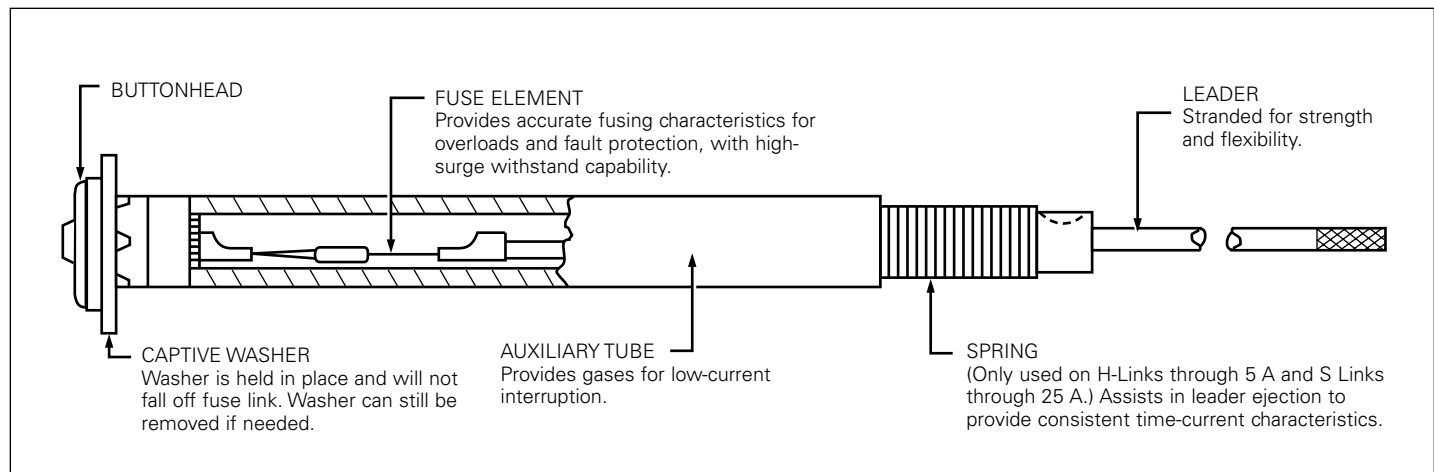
Typical Type D, S, and H (1 A through 5 A) fuse link construction
